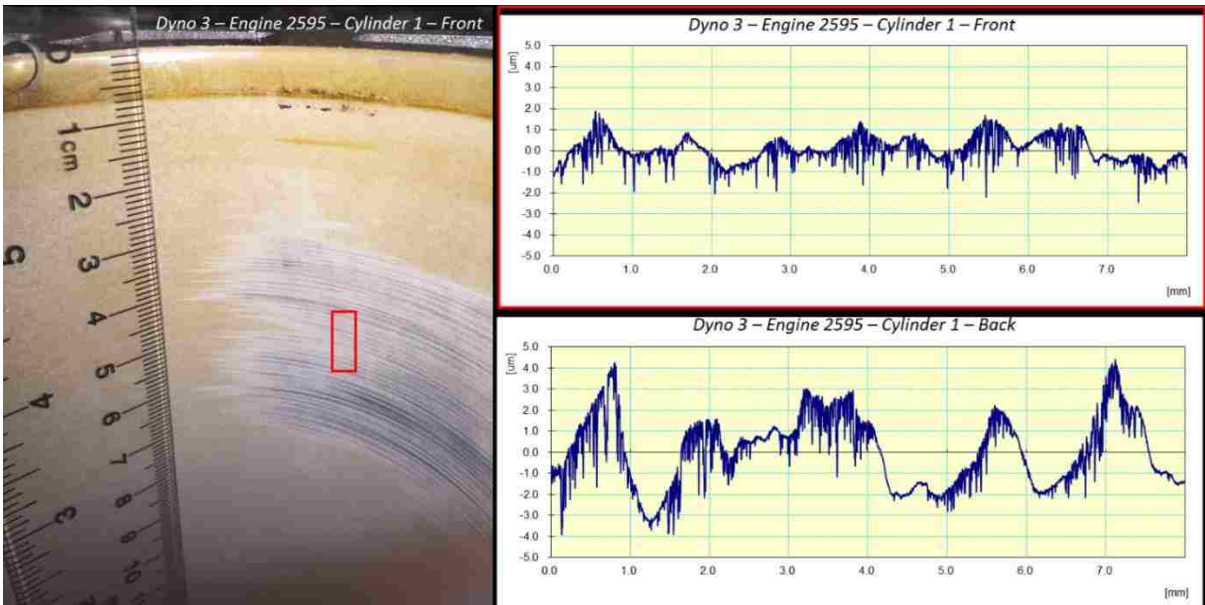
Dynamometer 3 - Engine 2595 - Profilometry - Ring Flutter - Cylinder 1
